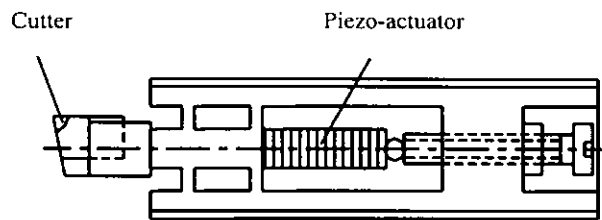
Cutting drive developed in Harbin Institute of Technology
